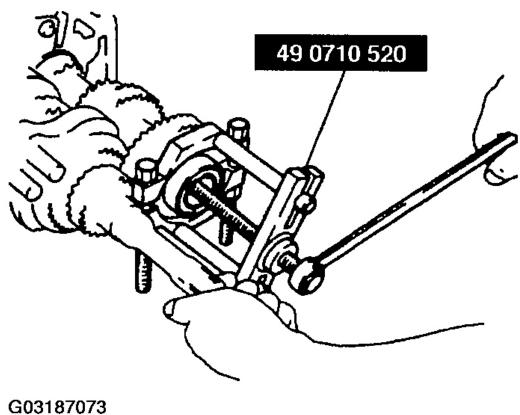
Removing Countershaft Front Bearing Courtesy of MAZDA MOTORS CORP.
